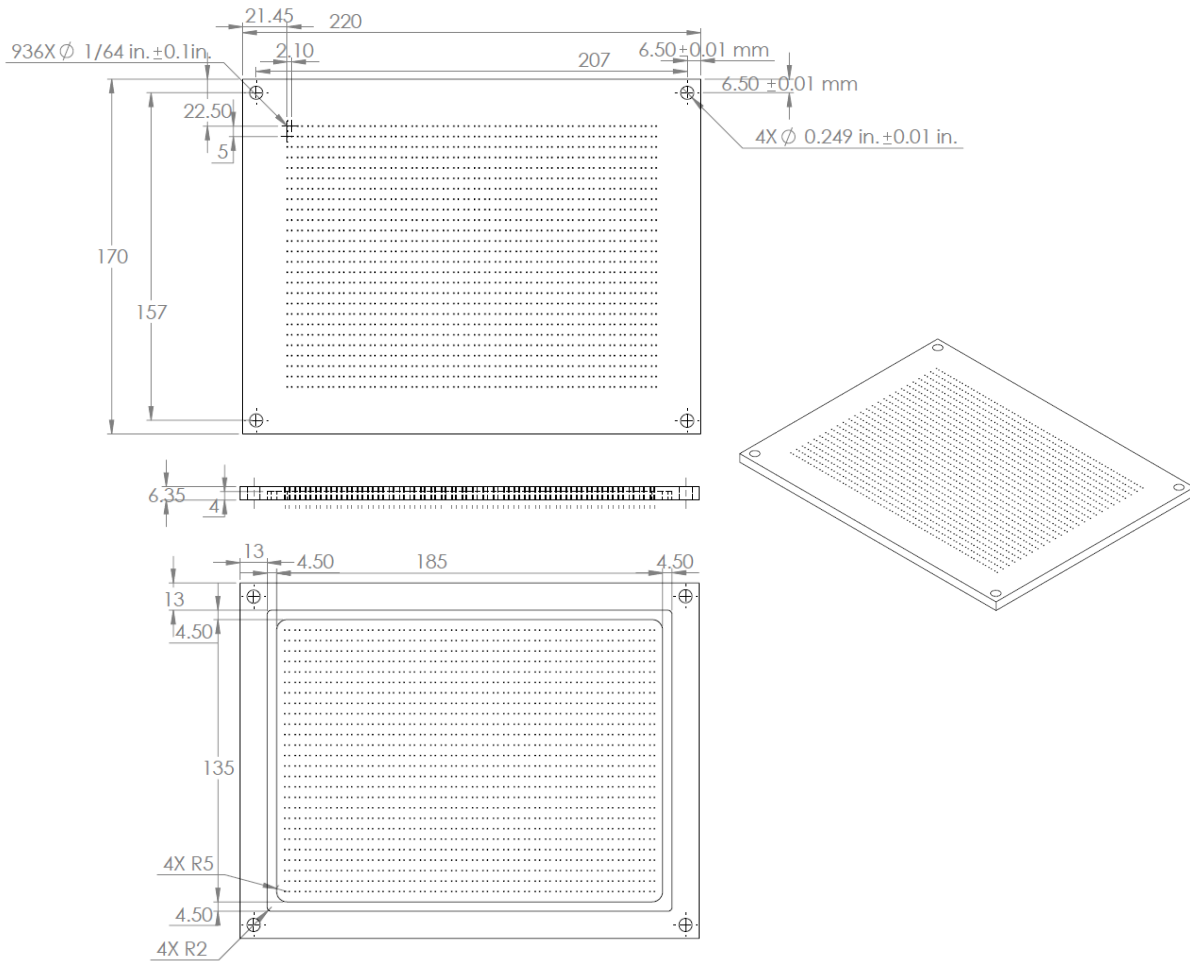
The flat plate for our final design. All dimensions are in mm with a tolerance of 0.1 mm unless otherwise specified.
